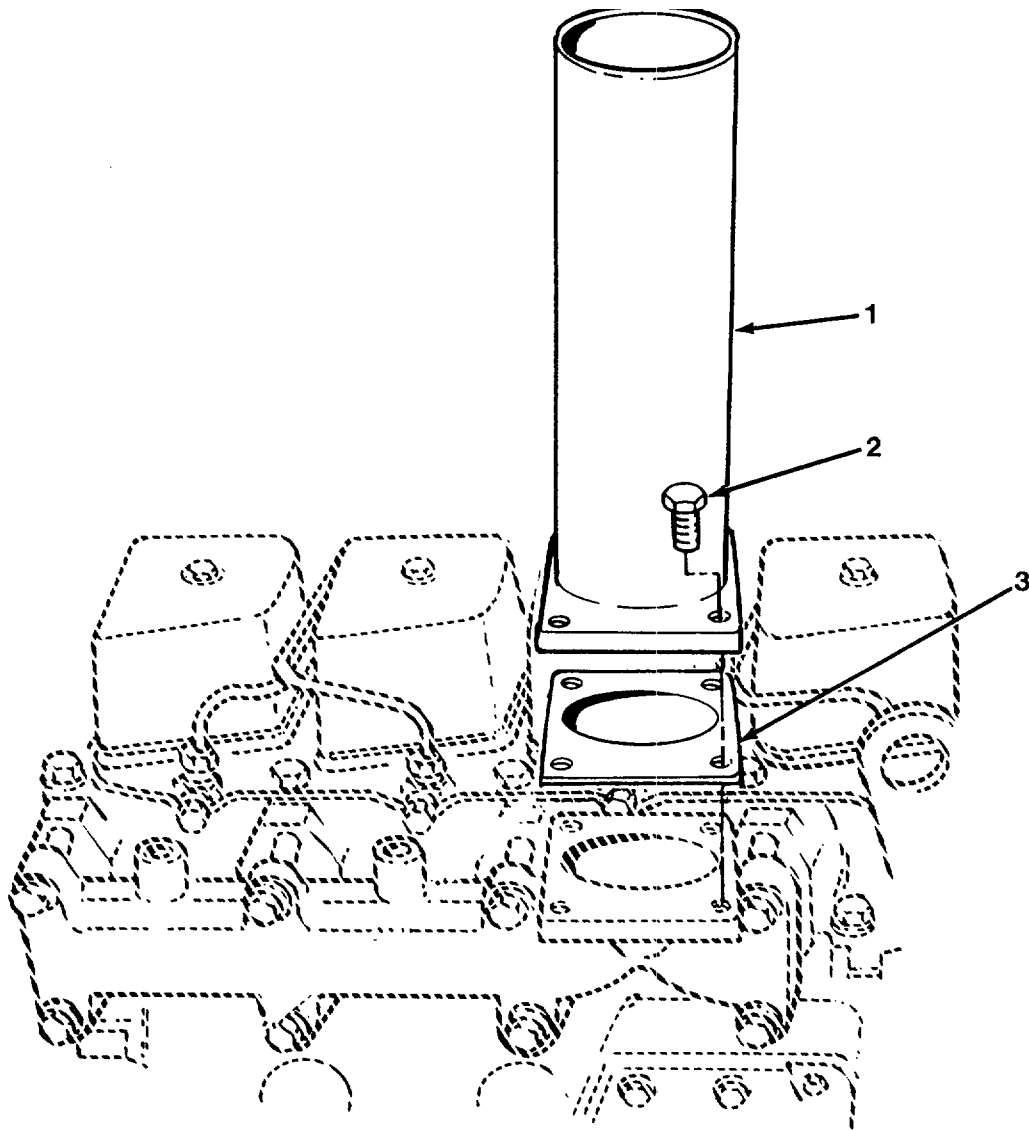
MUFFLER AND EXHAUST PIPE ASSEMBLY
